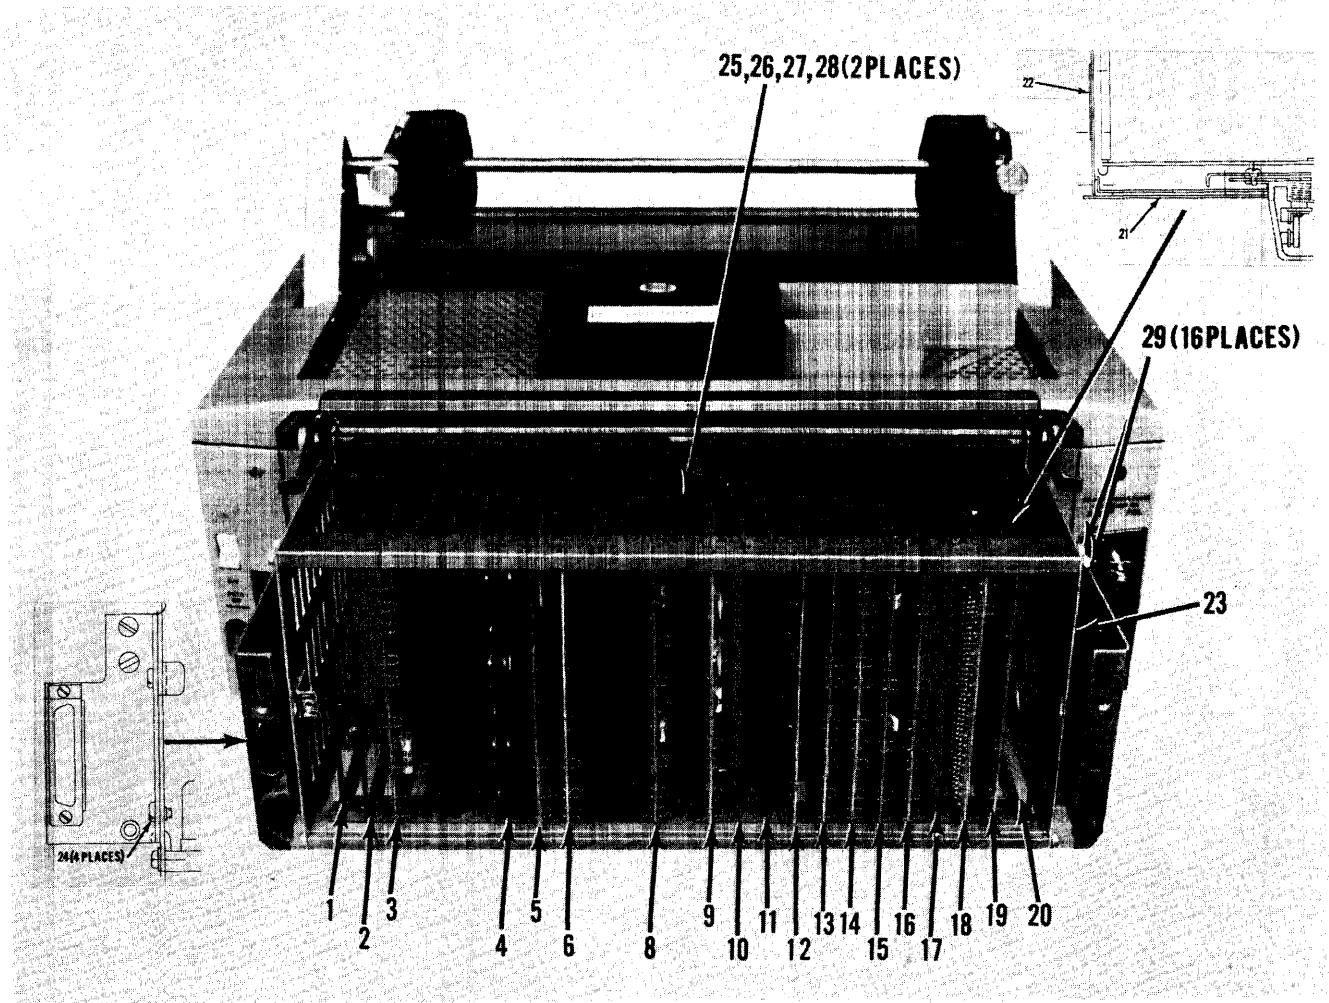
Typical Bustle Assembly for TermiNet 1200 B Printer
